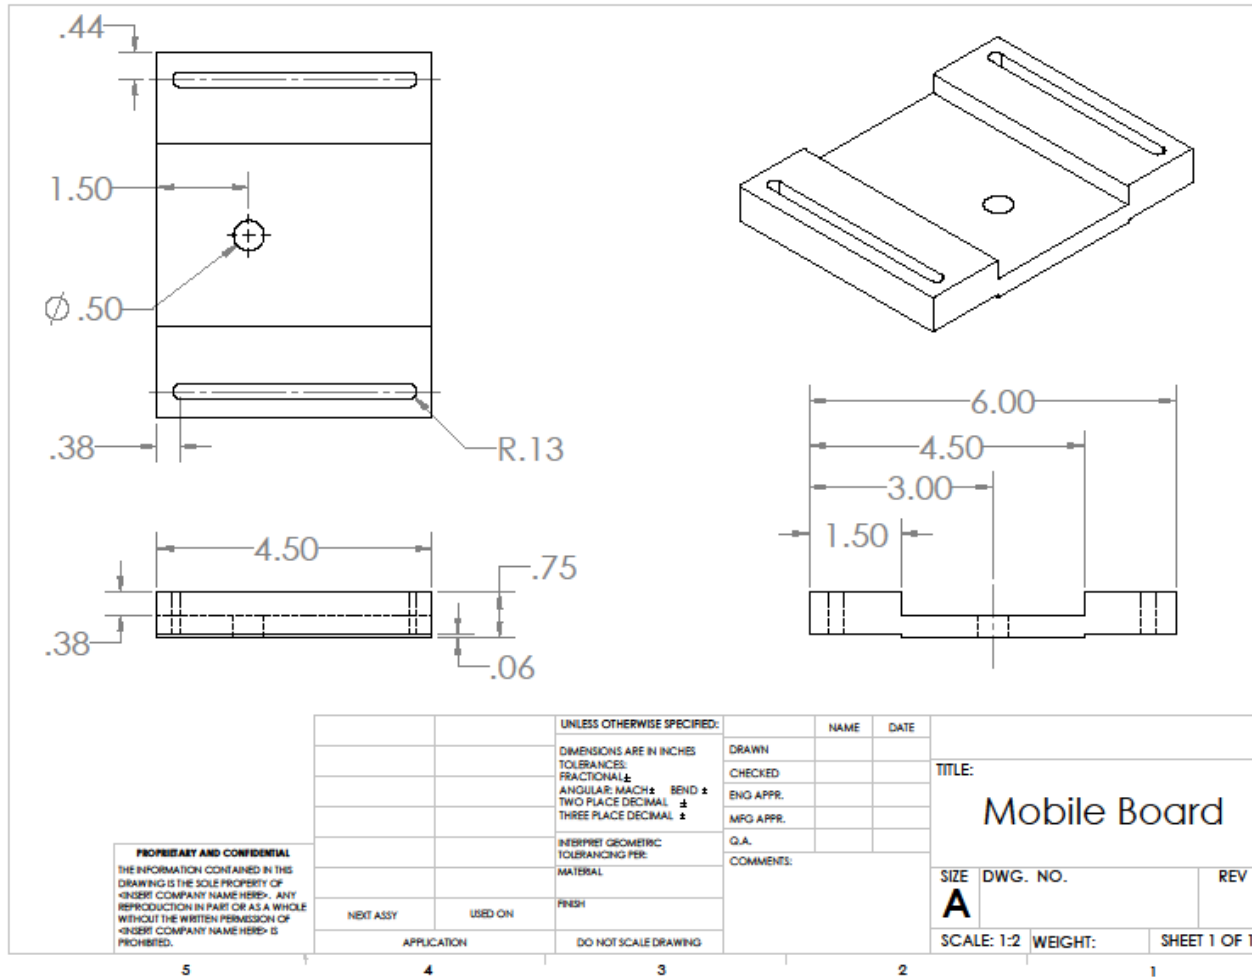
Technical drawing of the G-10 mobile platform. All dimensions in inches.
